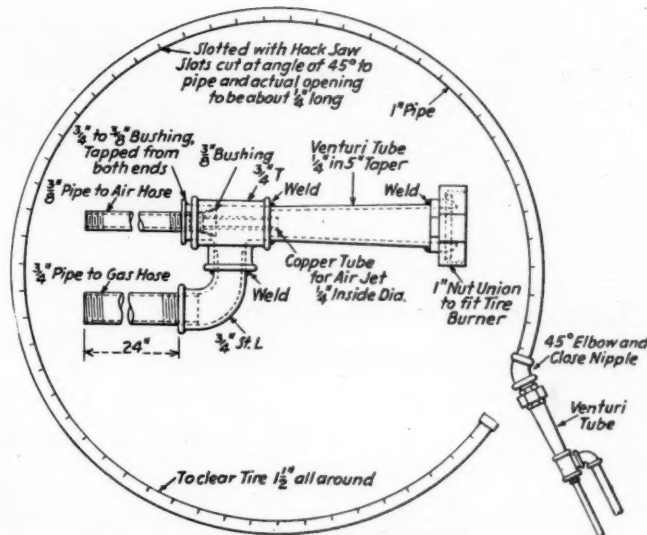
Tire heater for burning gas, showing details of the air injector and the gas mixing tee
